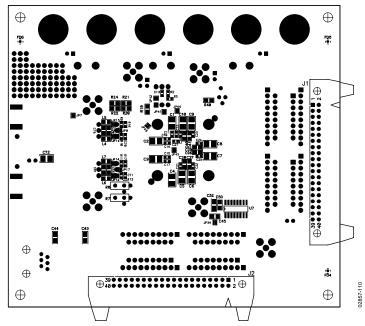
AD9773 Evaluation Board Components, Bottom Side
